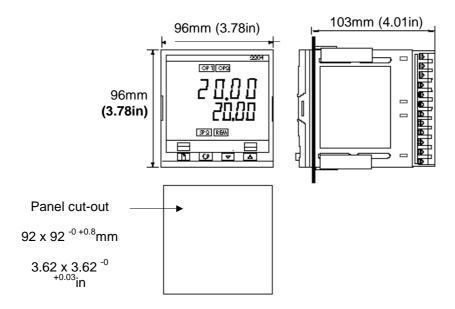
Outline dimensions of Model 2204e alarm unit
